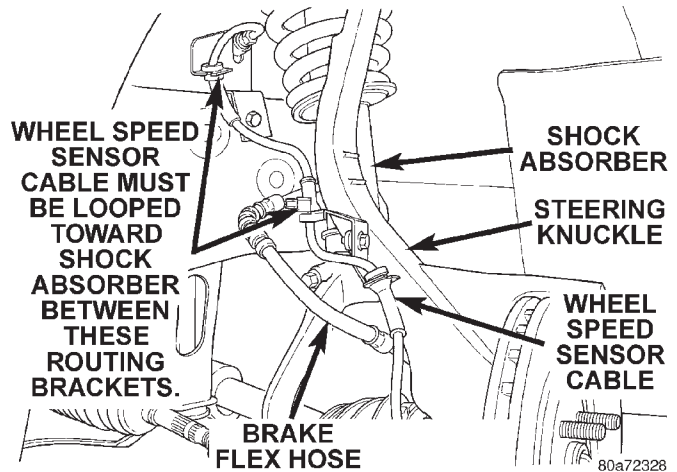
Correct Front Wheel Speed Sensor Cable Routing
